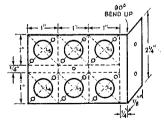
The inductor mounting bracket consists of an aluminum sheet bent as indicated. The large holes are 11/16 inch in diameter, and the small holes are 1/18 inch. The six coils should be positioned as shown.
